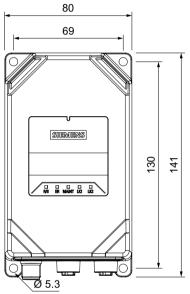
Dimension drawing RF360R Dimensions in mm
